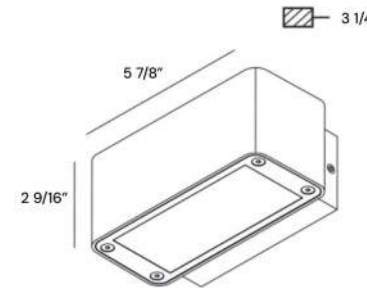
Product Selection - Alcon 14056 Architectural Outdoor LED Wall Light
